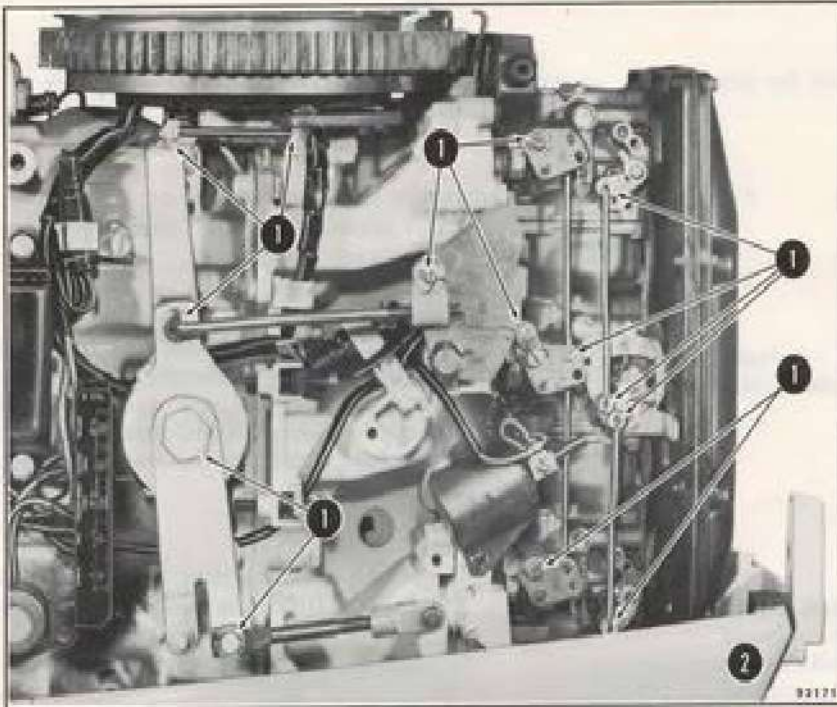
Shift, Throttle, Carburetor, Choke Linkages and Springs; Front Cover Latch; Throttle Cam and Roller Shaft (Starboard Side)
